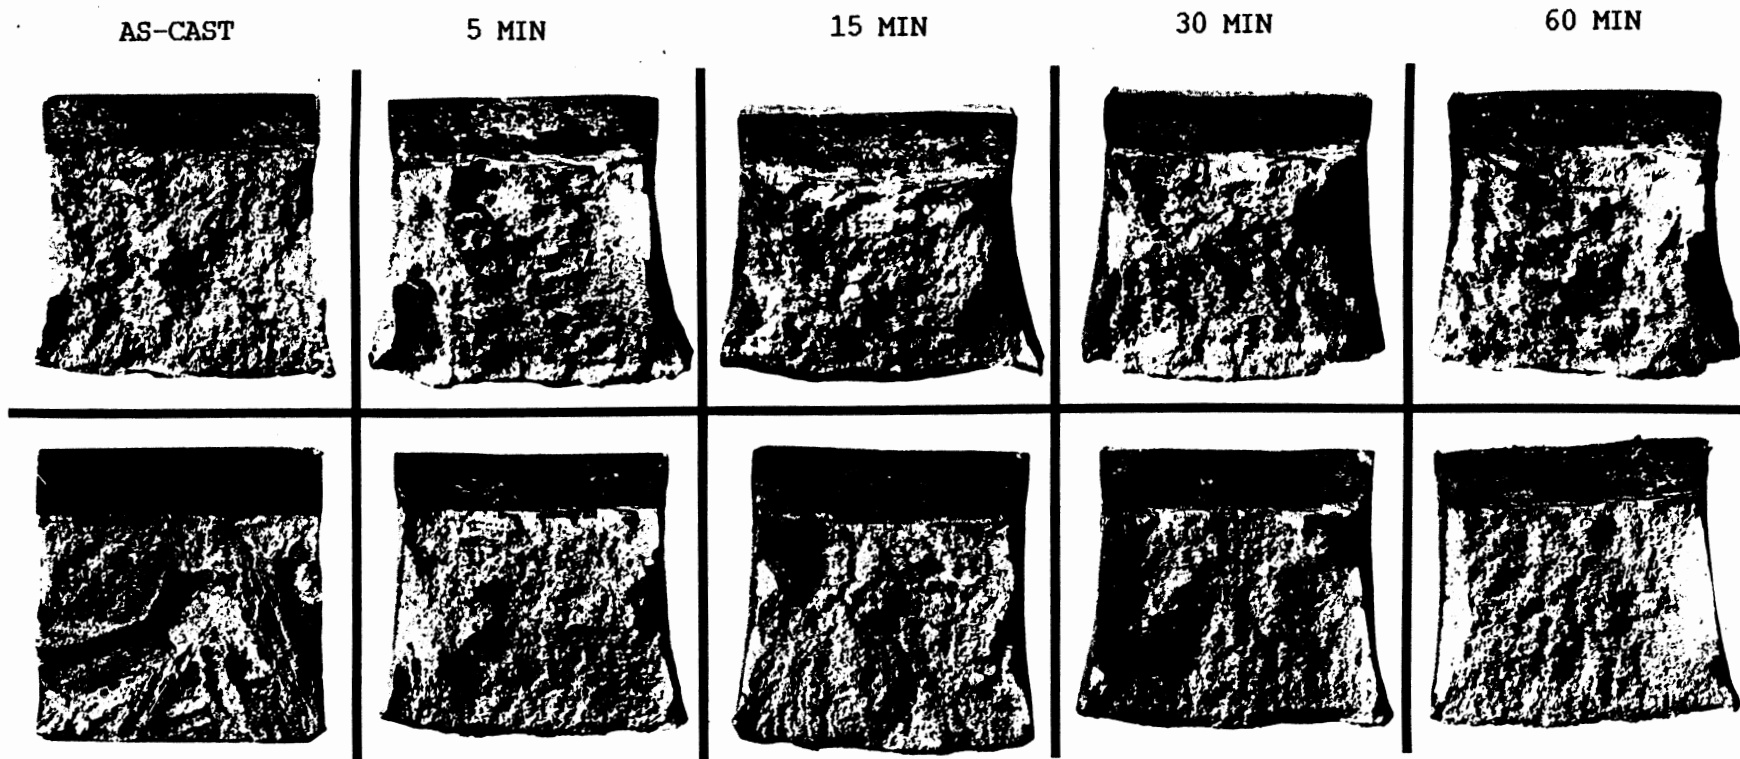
Uninsulated Mold Charpy Impact Fracture Surfaces.
